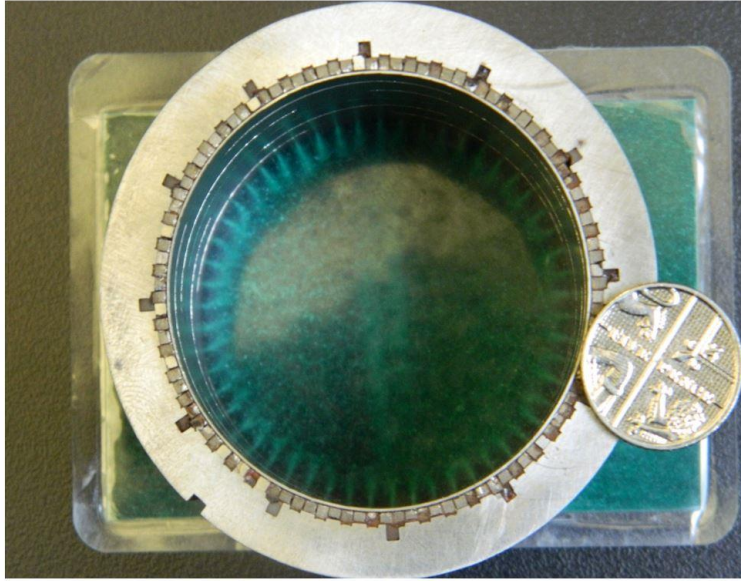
Completed magnetic gear stator assembly with 5p coin for size reference
